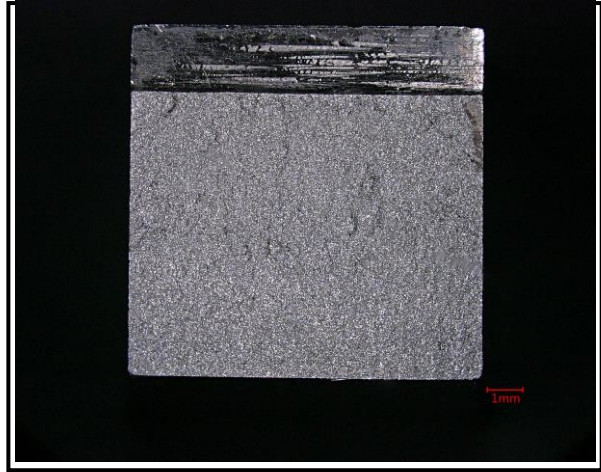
Charpy Impact Test specimen fracture surfaces for HT1 condition
